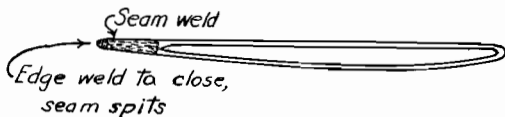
is an edge weld adjacent to an electric seam weld.
